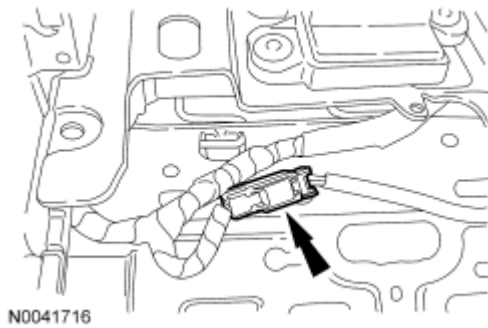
Locating Cushion Heater Mat Electrical Connector
